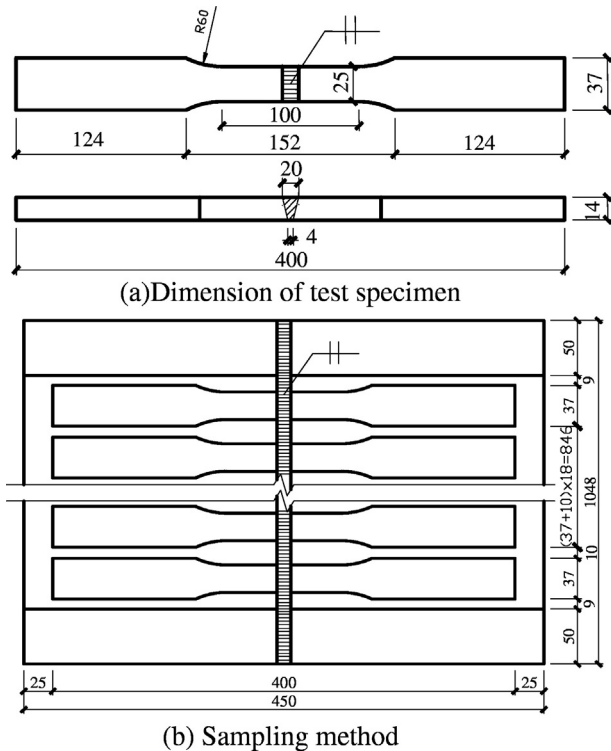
Preparation of butt weld connection specimens for tests.
